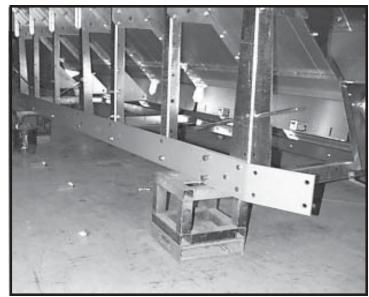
Linkage bars and short linkage bar weldments set out by dryer, and pivot rods inserted in pivot rod brackets.
